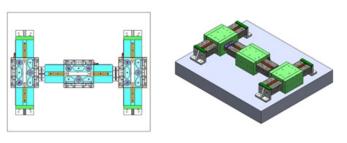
Air bearing xy-stage. Air bearing and flexures enable smoother motion by eliminating over constraints [2].
